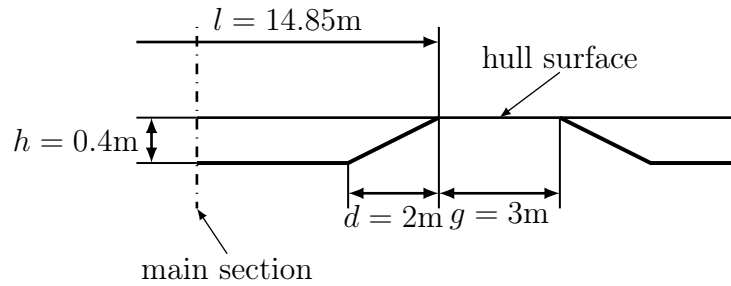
Construction details of the segmented bilge keel for the DTC hull
